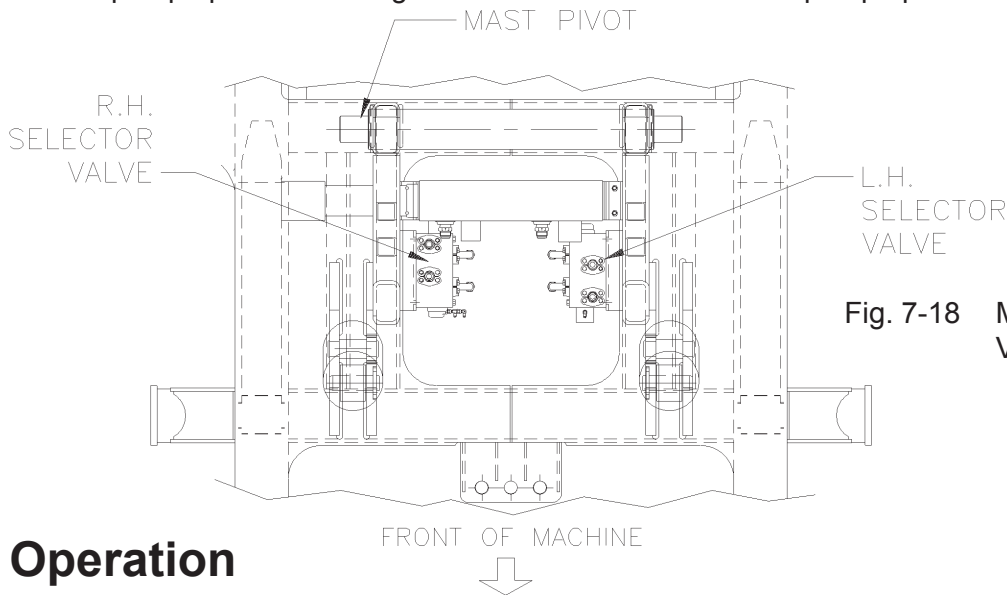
Main Frame showing Selector Valve mounting location.
